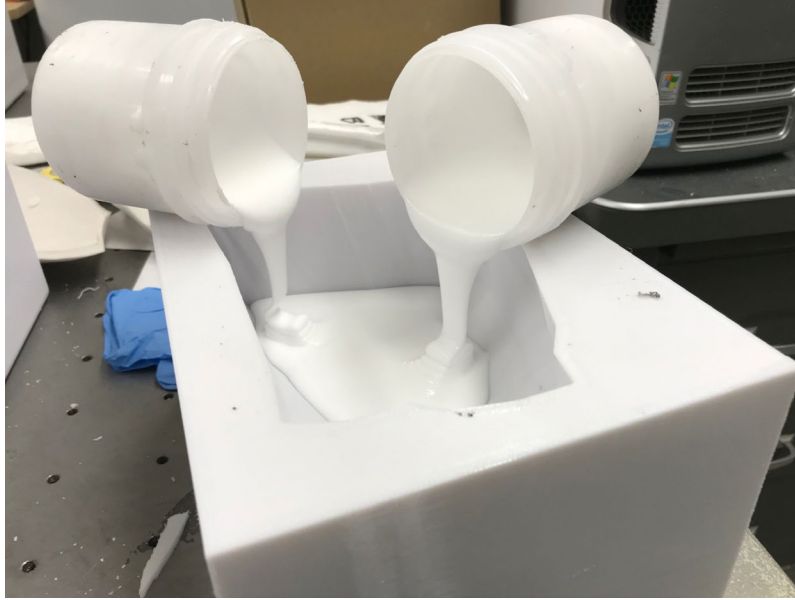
Composite mixtures were degassed and poured into the lower section of the printed mold
